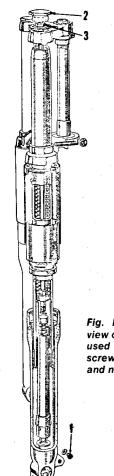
Cross sectional view of front suspension unit used on early models. Drain screw is shown at 1. Plug (2) and nut (3) must be removed to service unit.
